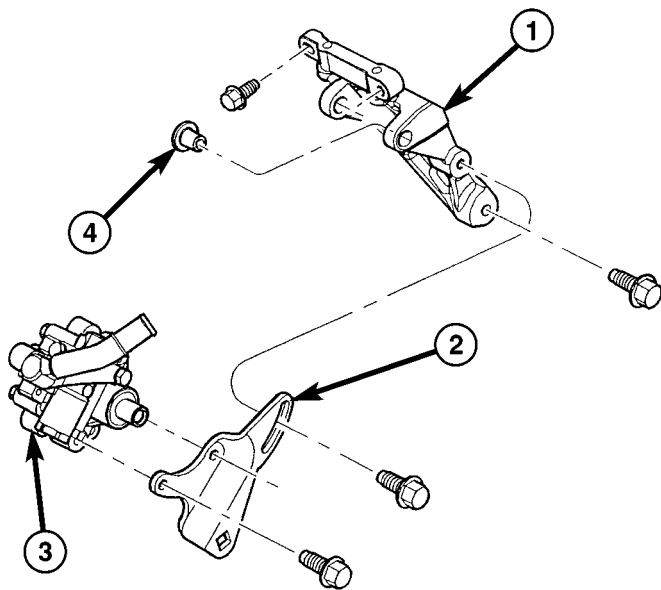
Pump Bracket Mounting - 2.7L Engine
